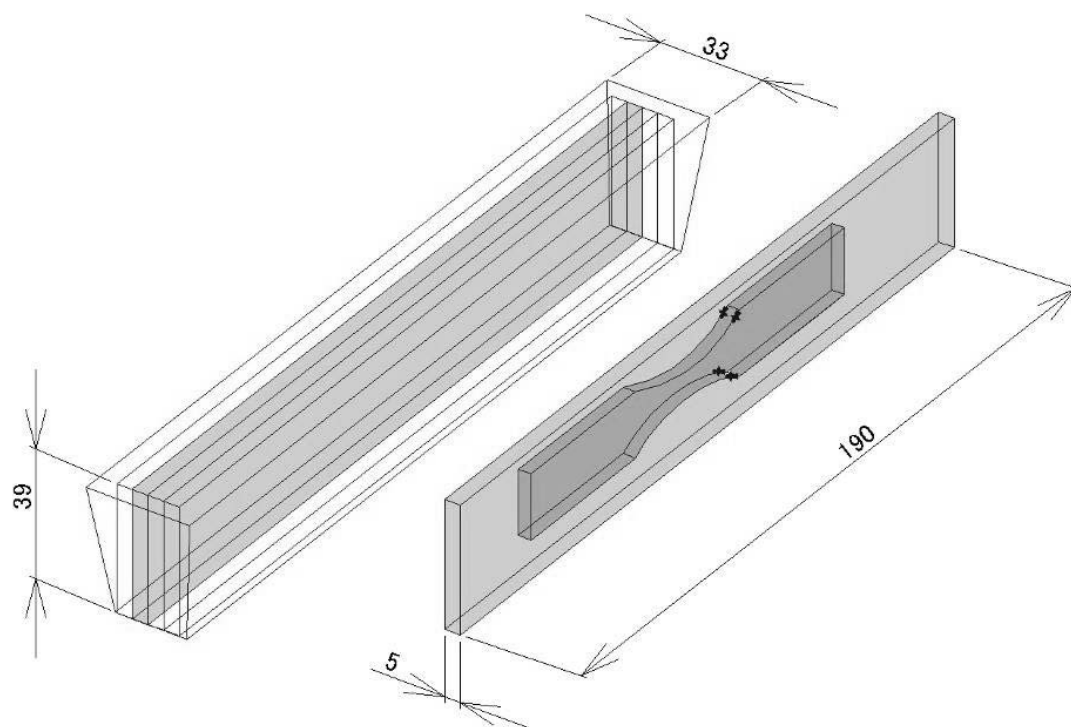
Boat-shaped mold from which specimen blanks were sampled.
